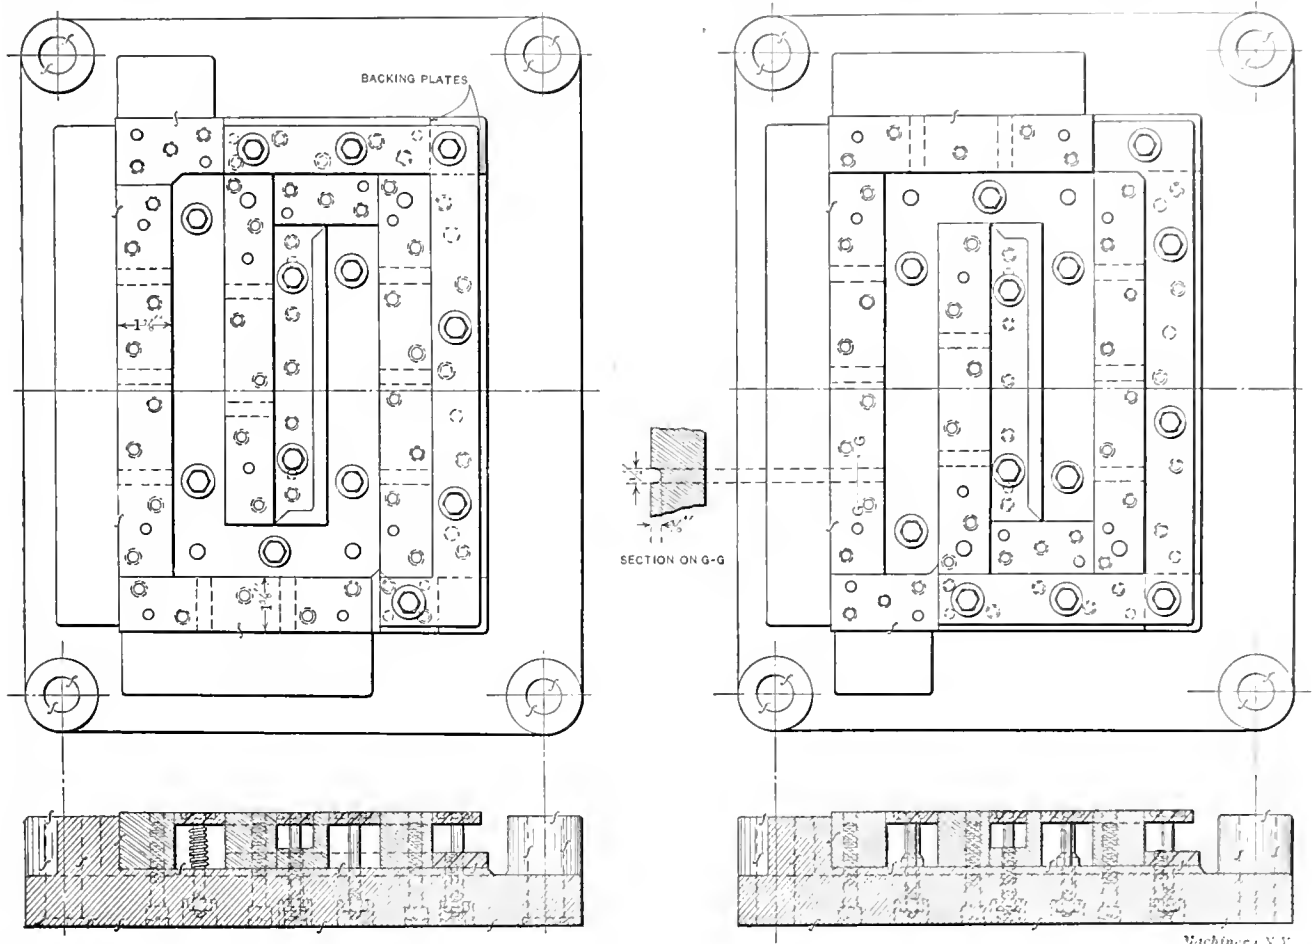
Plan and Section of Upper and Lower Portions of Die for Cutting Pieces B and C in Fig. 2.
